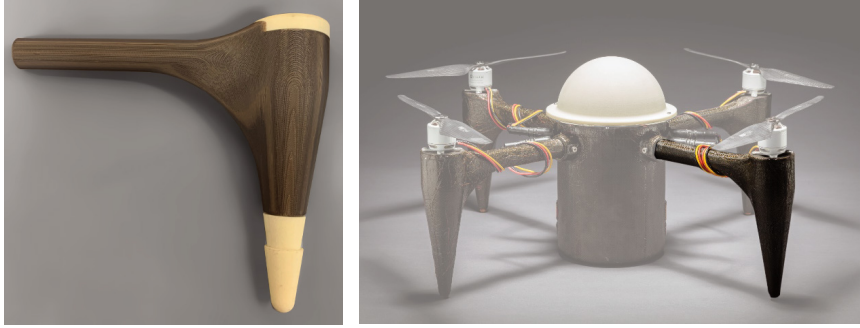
Mold and finished product for the CRACUNS aircraft. Left, Additively manufactured layup mold using soluble support material (brown) and glass-filled nylon inserts (cream color). Right, Assembled CRACUNS aircraft showing the composite leg assemblies.
